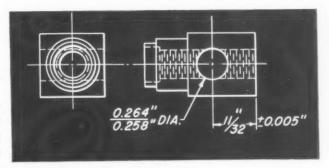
A Typical Square Contact Lug that 18 Drilled on an Automatic Screw Machine Equipped with an Index Drilling Attachment
